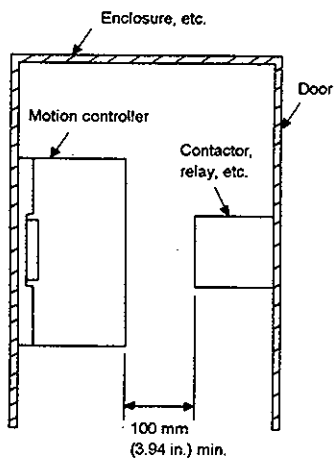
Clearance to Instruments in Front of Motion Controller
